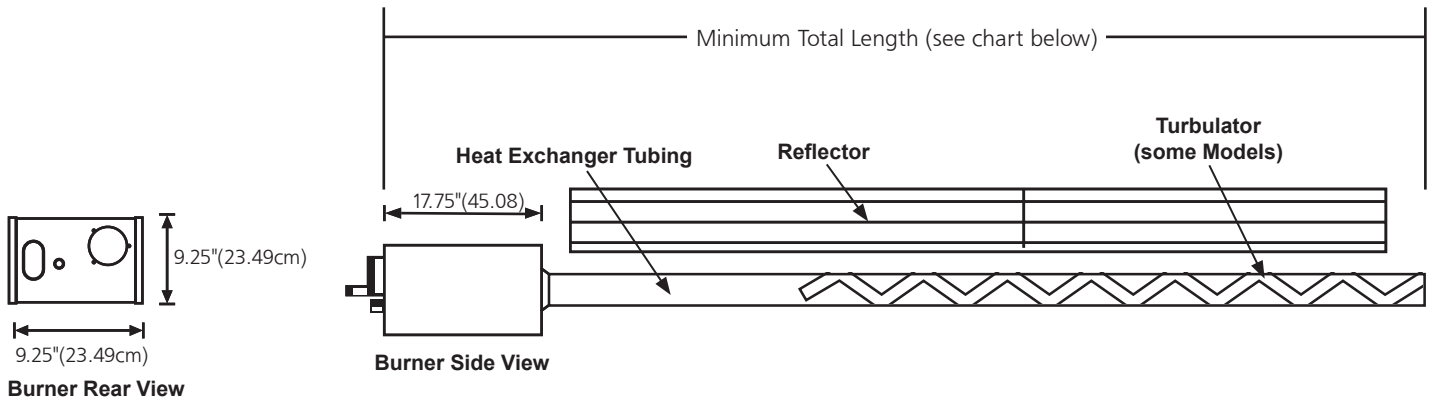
Ener-Radiant SP Dimensions & Suggested Mounting Heights
